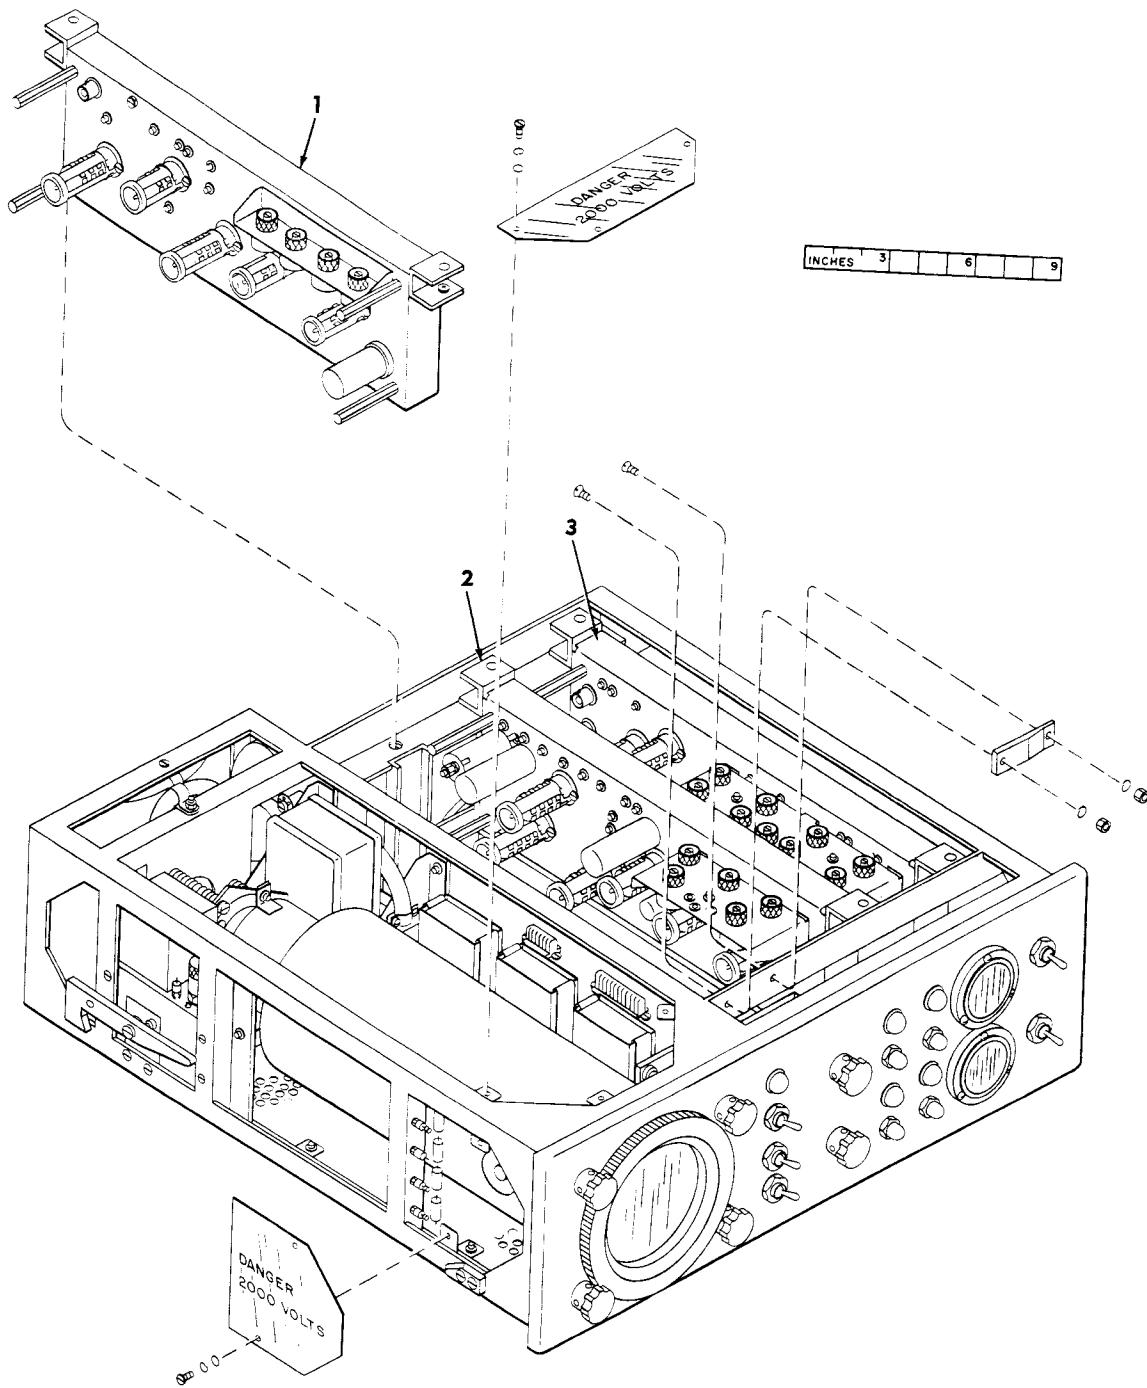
Amplifier, electronic control (9995950)—partial exploded view
